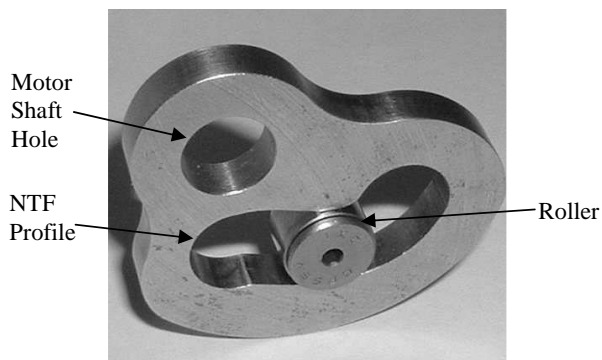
The Nonlinear Mechanical Transformer - Disk Cam.
